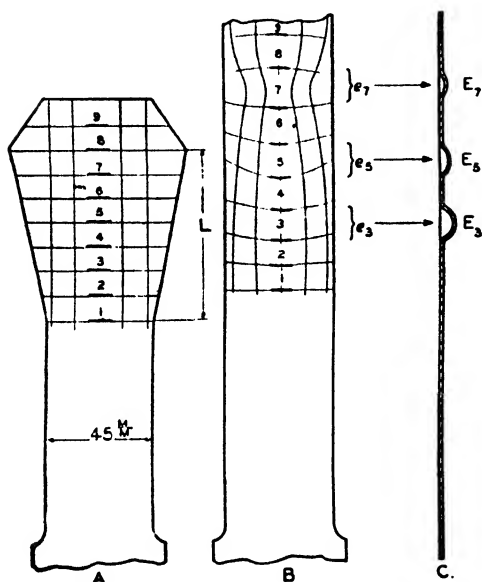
Specimen used in combined wedge-drawing and cupping test: A before test, B after test, and C showing miniature Erichsen impressions E_3 , E_5 and E_7 made in selected zones of deformation e_3 , e_5 and e_7 on specimen B.
